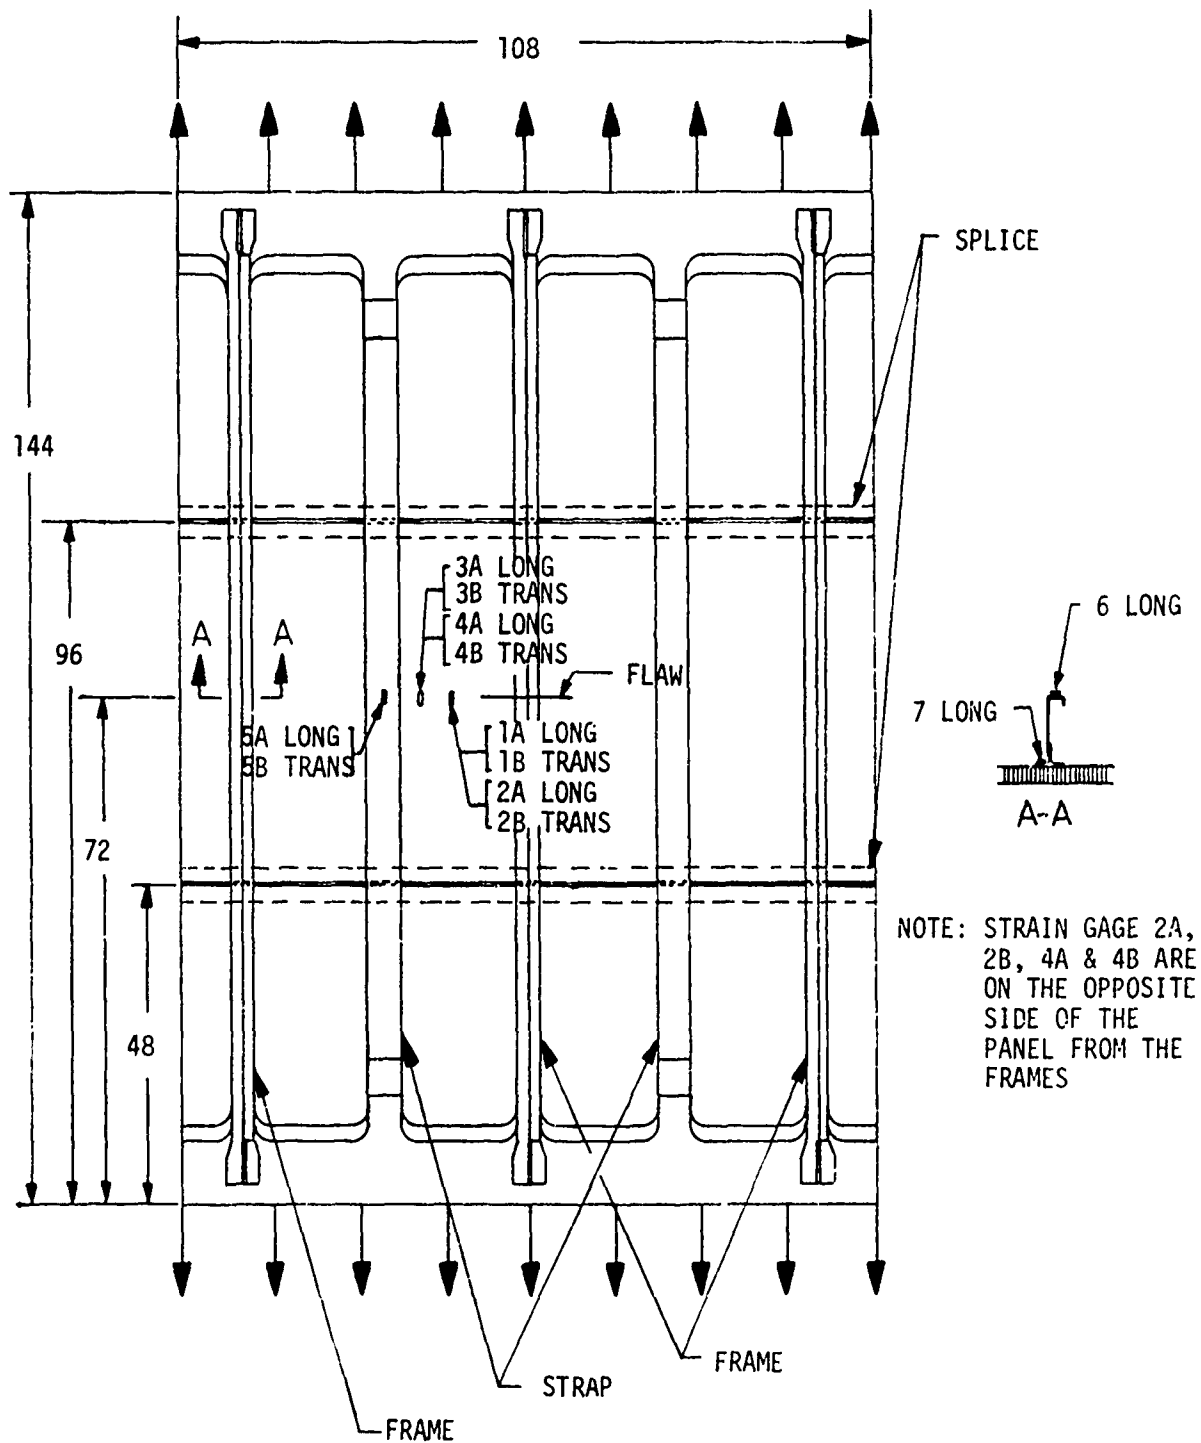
PANEL GEOMETRY STRAIN GAGE & INITIAL FLAW LOCATION-H30C
